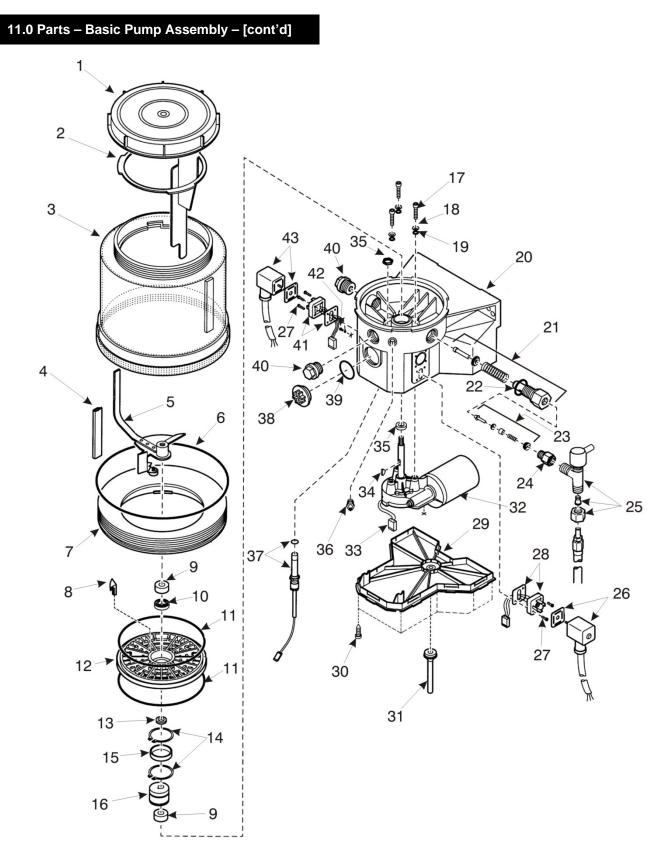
Basic Pump Assembly BreakerLube CML Series
